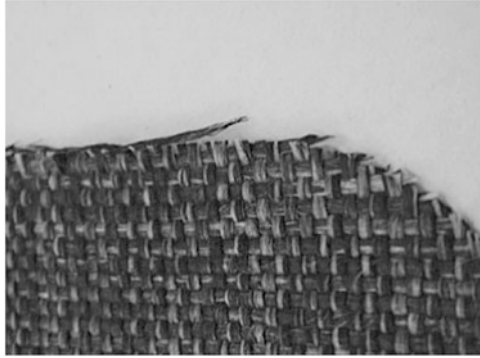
Cutting edge of a CF/PEEK woven fabric after water jet cutting; cutting edges are not secured, risk of threads dropping out, especially at the edges in yarn system direction [6]
